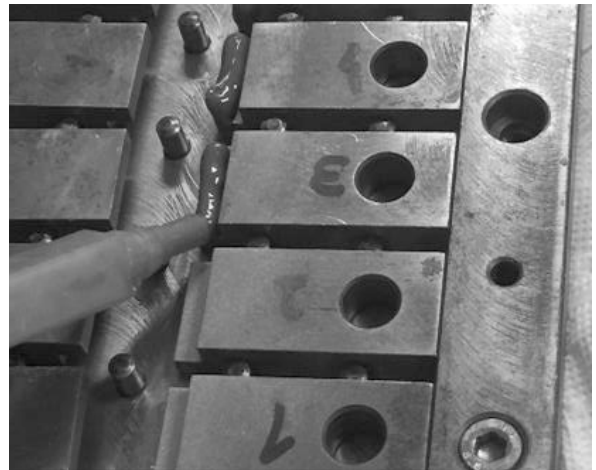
Manufacturing TAST specimens (adhesive application).
